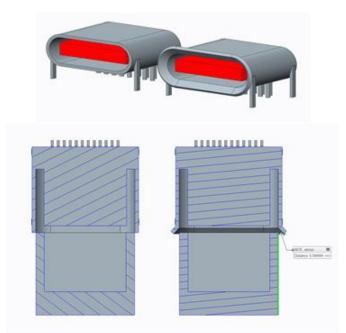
USB Type-C Cable Receptacle Flange Example
